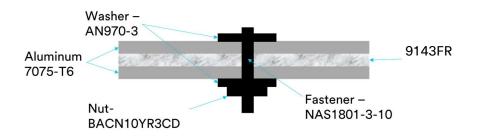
Schematic of fastened construction used in simulated floor construction salt spray testing
